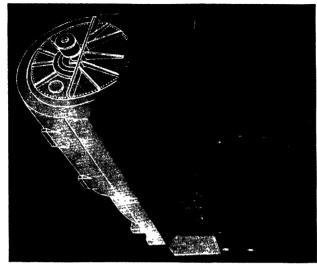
Surface condenser showing welded shell construction.
